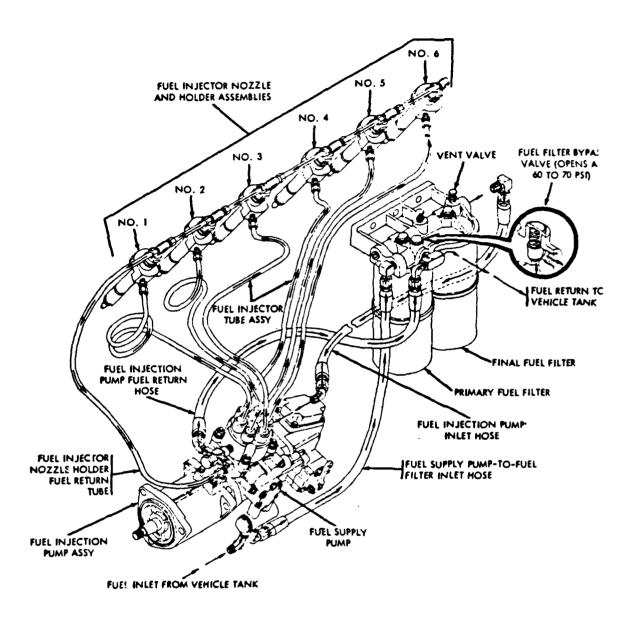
, THE LDS-427-2 PRIMARY FUEL SYSTEM
